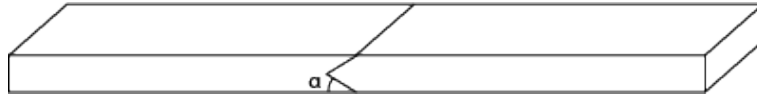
A Specimen Drawing Repaired with Double Scarf
